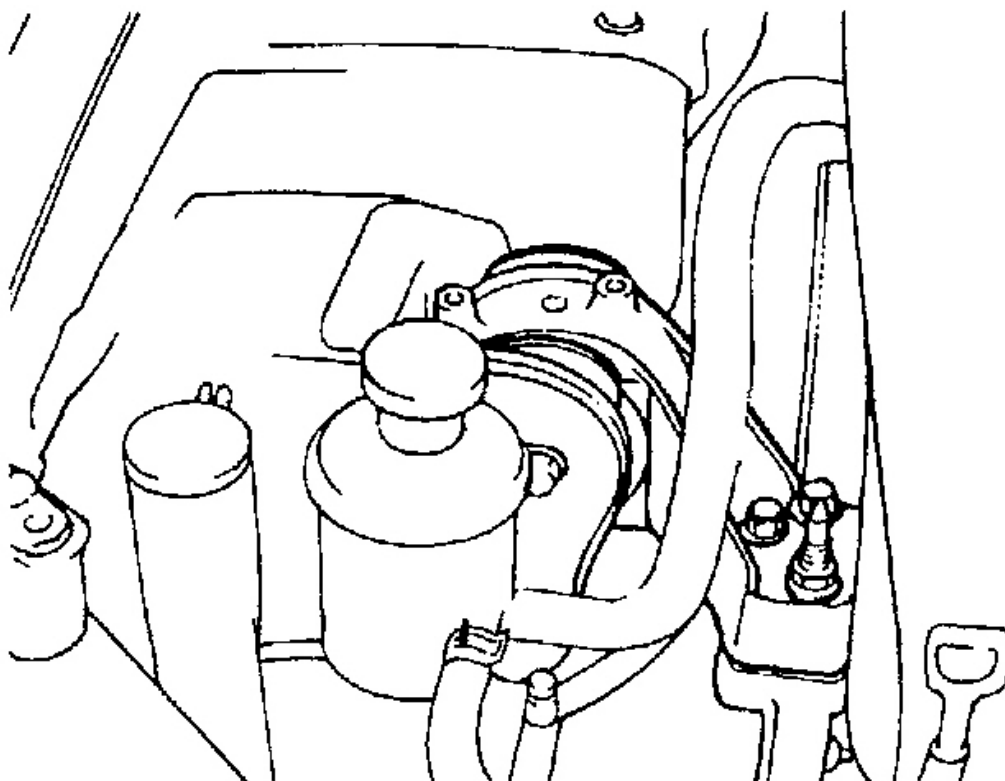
Removing Engine Mount Bolts (1 Of 2)
